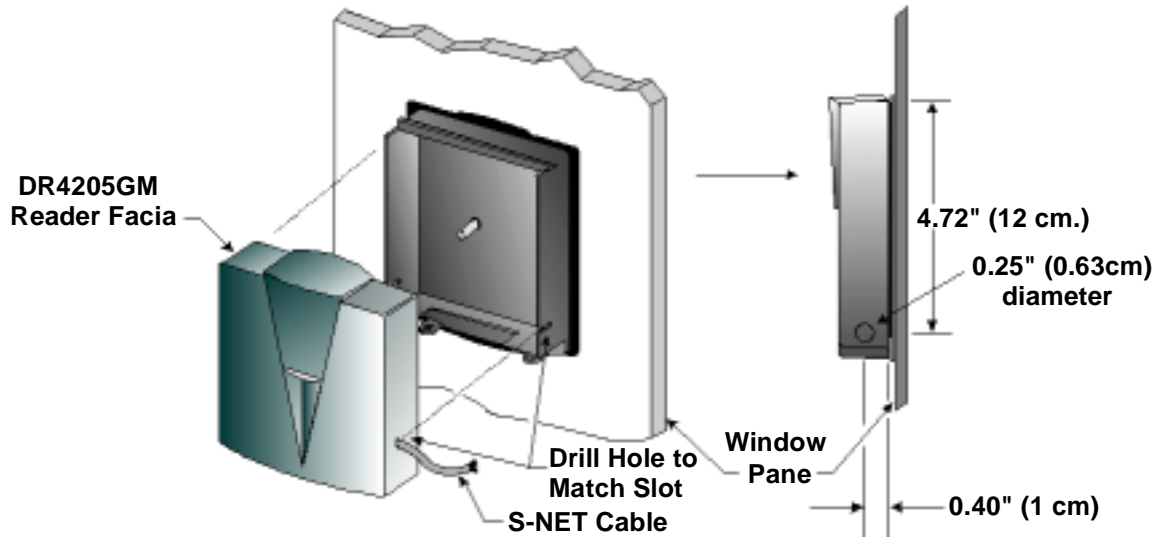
4205GM (& 4208SGM): Routing Cable & Attaching Facia
